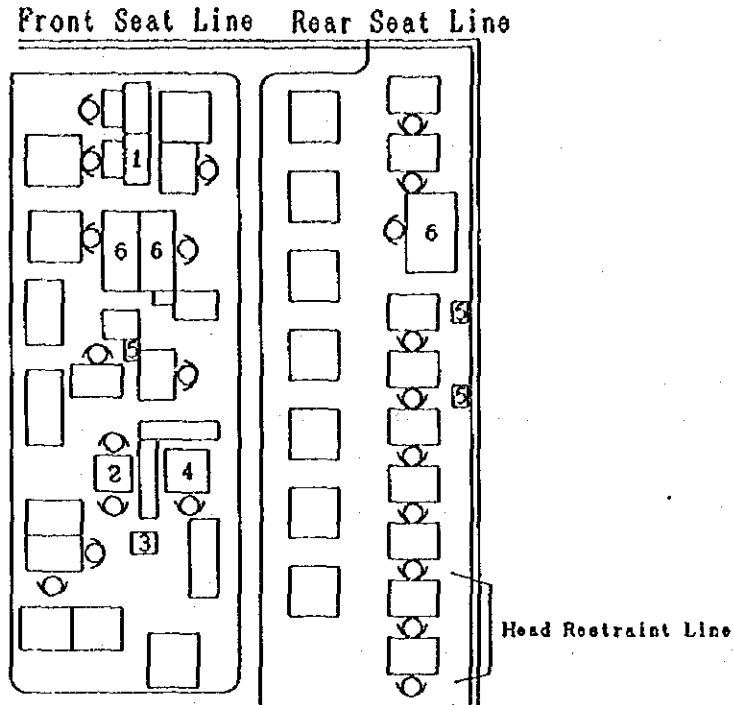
Equipment Layout of Assembly Process (Bus Seat Division)
